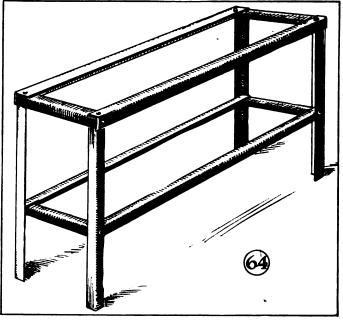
A stand for holding flywheels, coil assemblies, etc. It is made of angle iron and will accommodate assemblies on top and on the shelf
